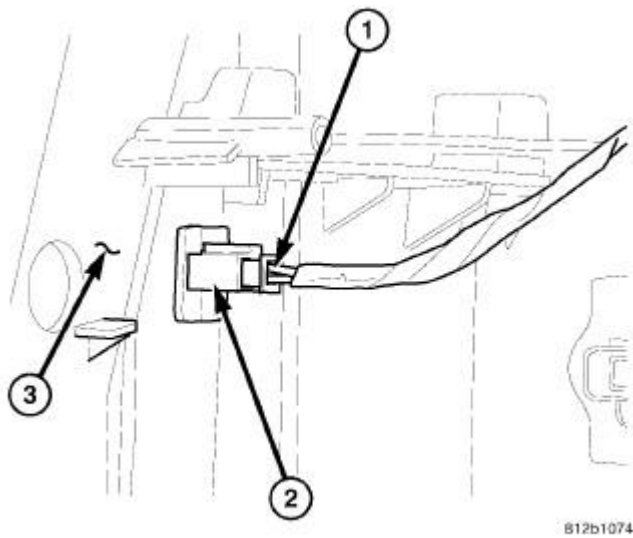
Sensor-Evaporator Temperature Removal & Installation
